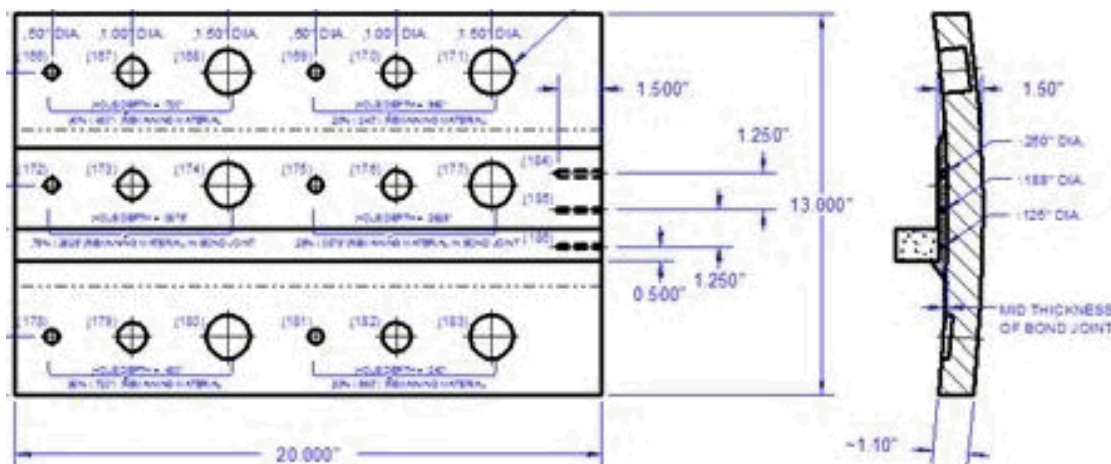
Dimensions and Flaw Lay-Out for NDI Specimen WIND-3-110-SPAR-150.
